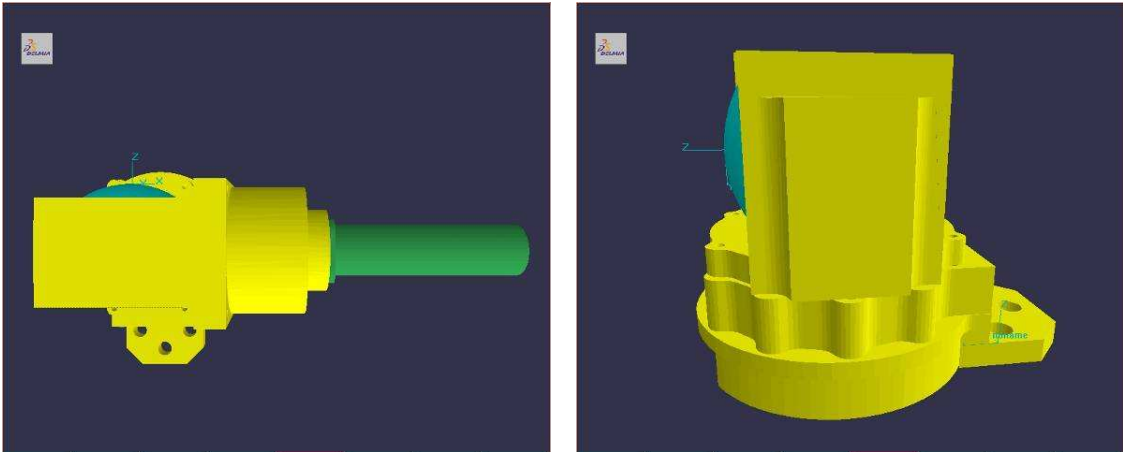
Top and side view of RIM mounted on Beagle 2 wrist motor housing.
